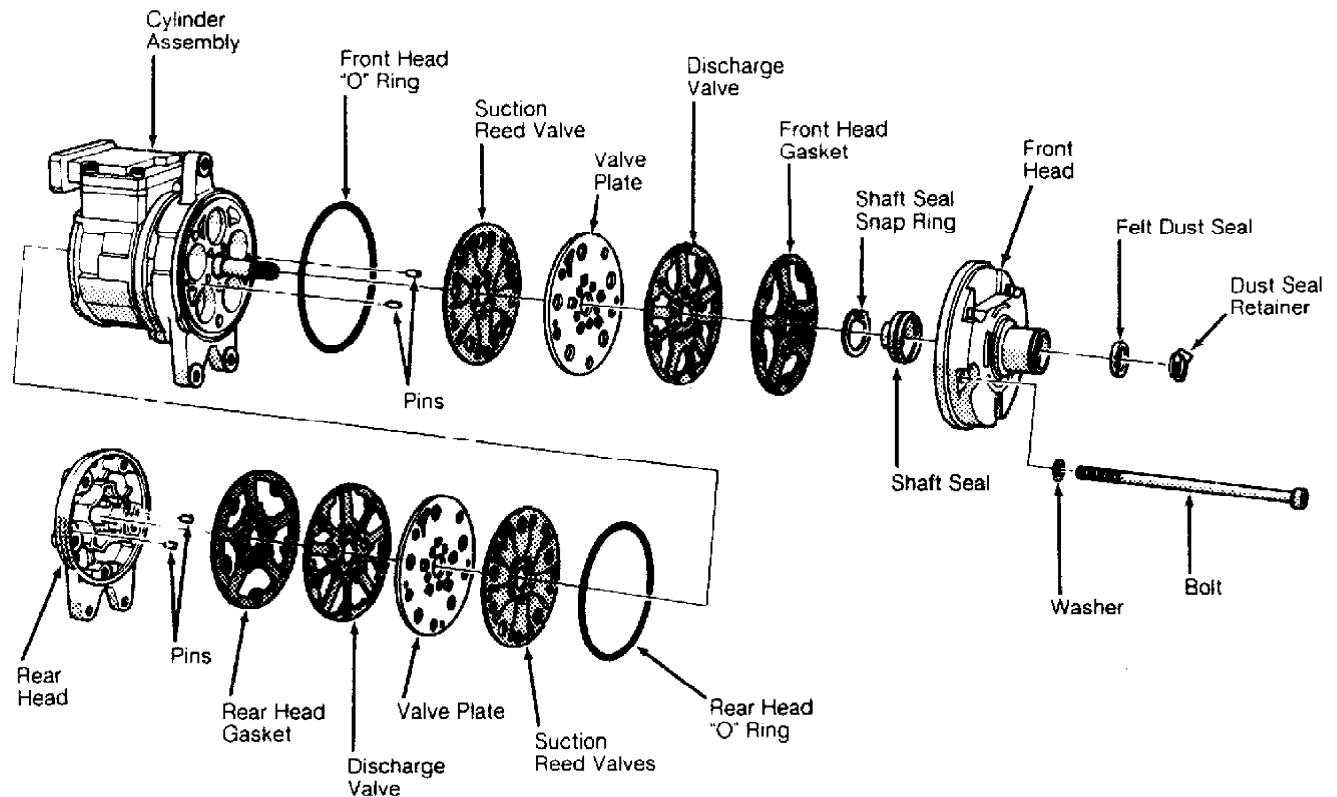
Exploded View Of Compressor (Nippondenso 10PA17, 10PA17A & 10PA20 10-Cylinder)
